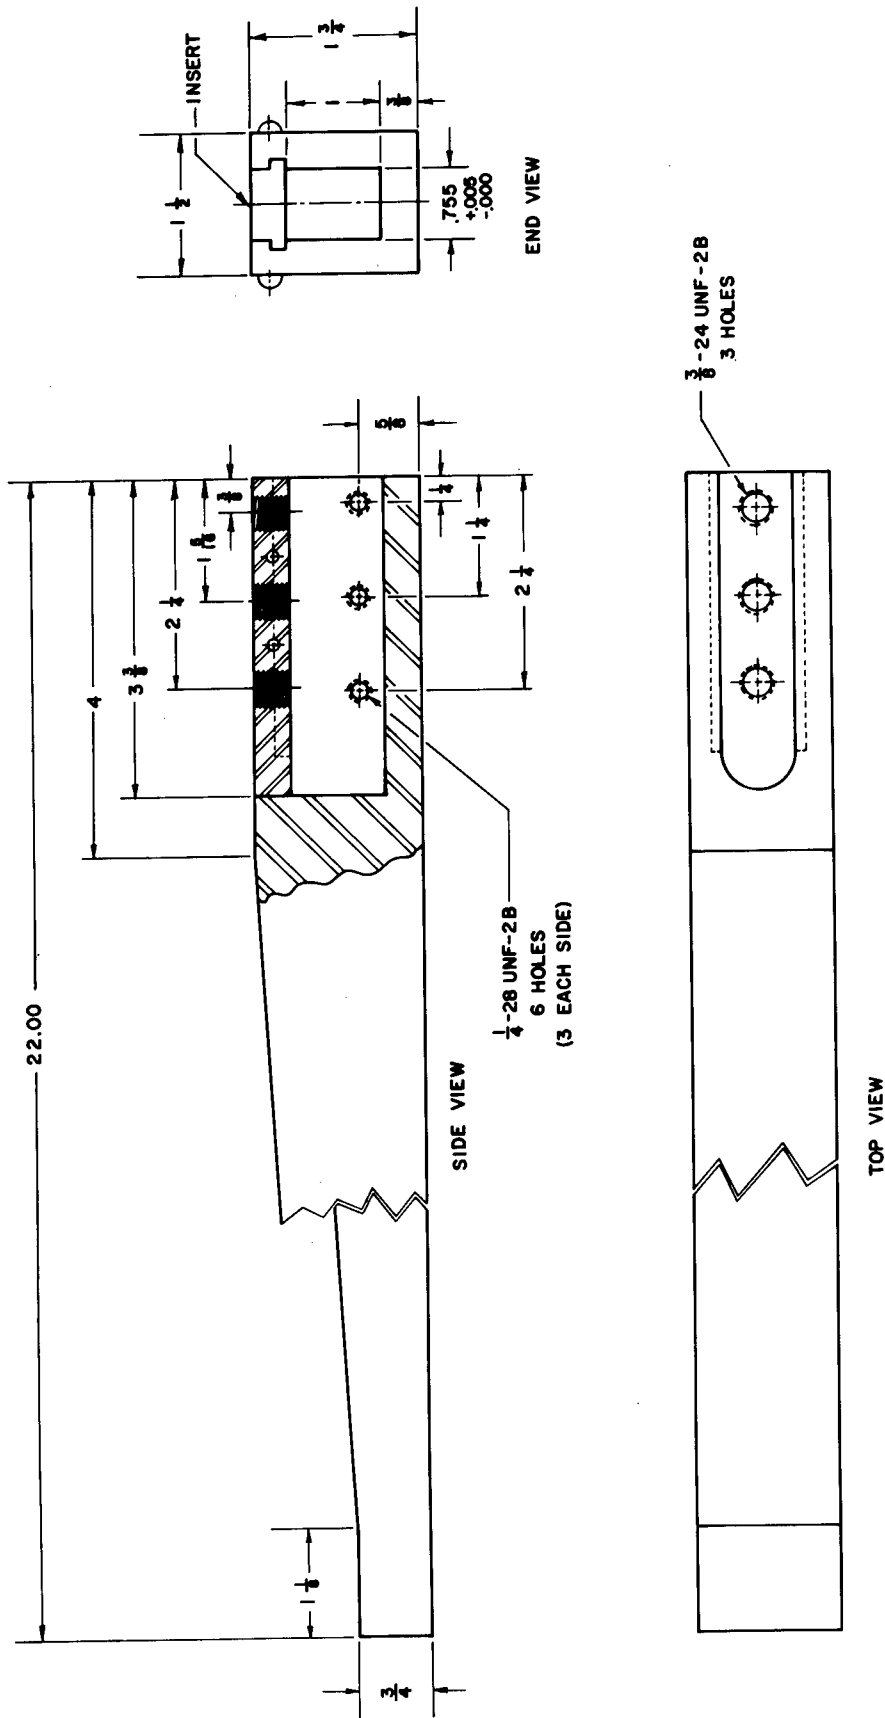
Extension bar for fatigue machine. Material: steel, 4340.
